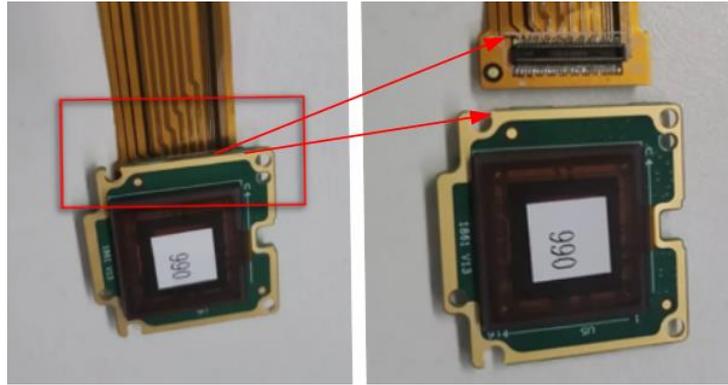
The connection between the imaging board connector and the FPC cable connector
